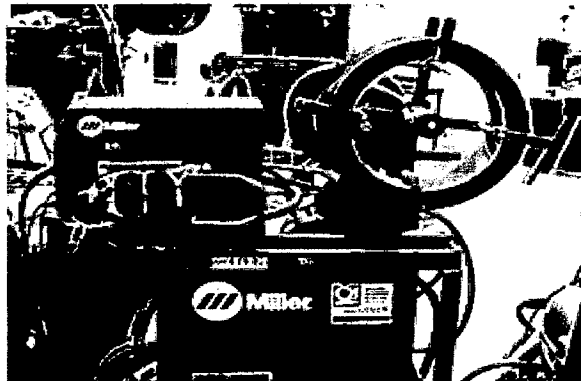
Gas metal arc welding wire feed unit
